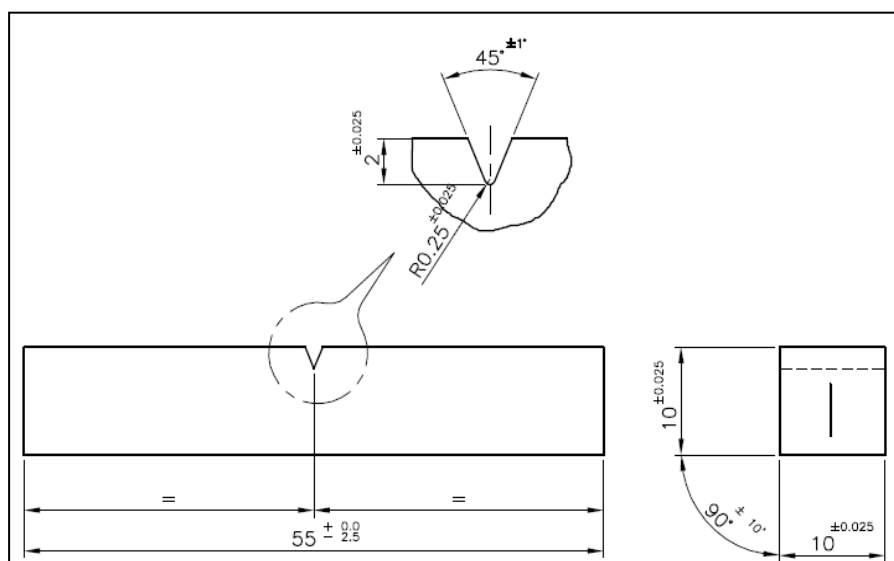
Schematic representation of a Charpy impact specimen with given dimensions in mm.
